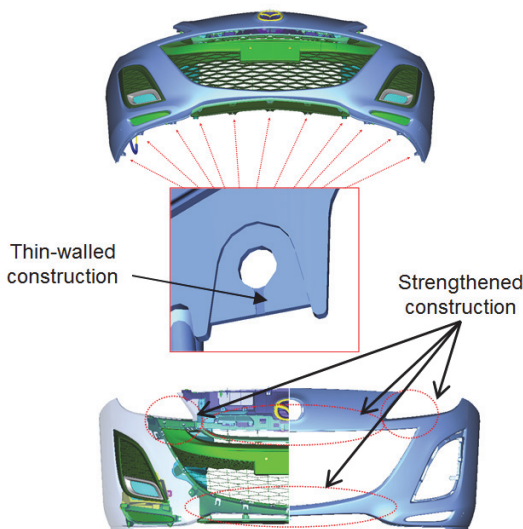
Thin-Walled and Strengthened Construction in Fastenings
